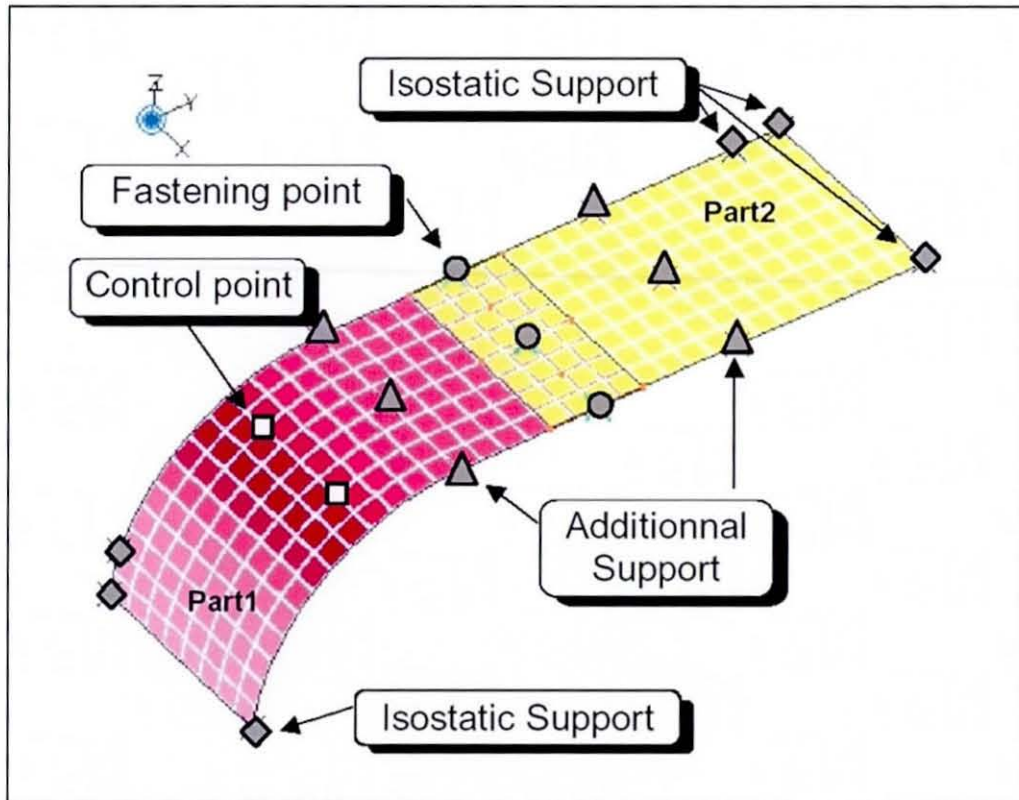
Spotwelded sheetmetal assembly with modelled constraints (Sellem and Riviere, 1999)
